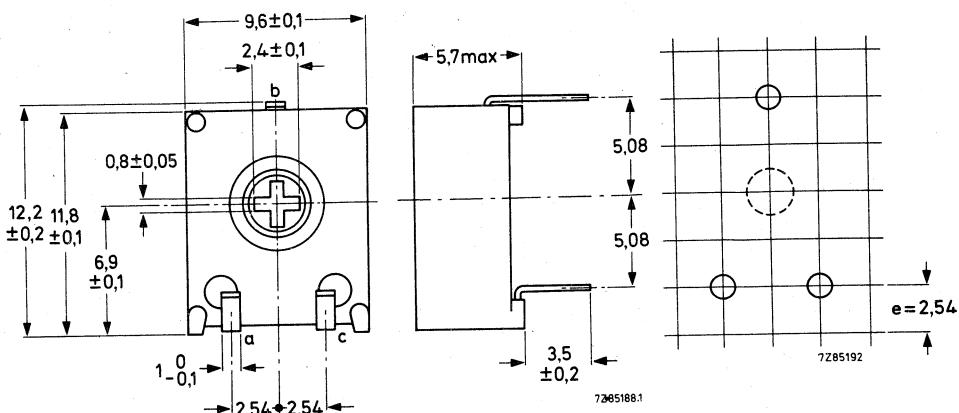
Horizontal mounting, version with cross-shaped recess (non-insulated hot wiper, b).
